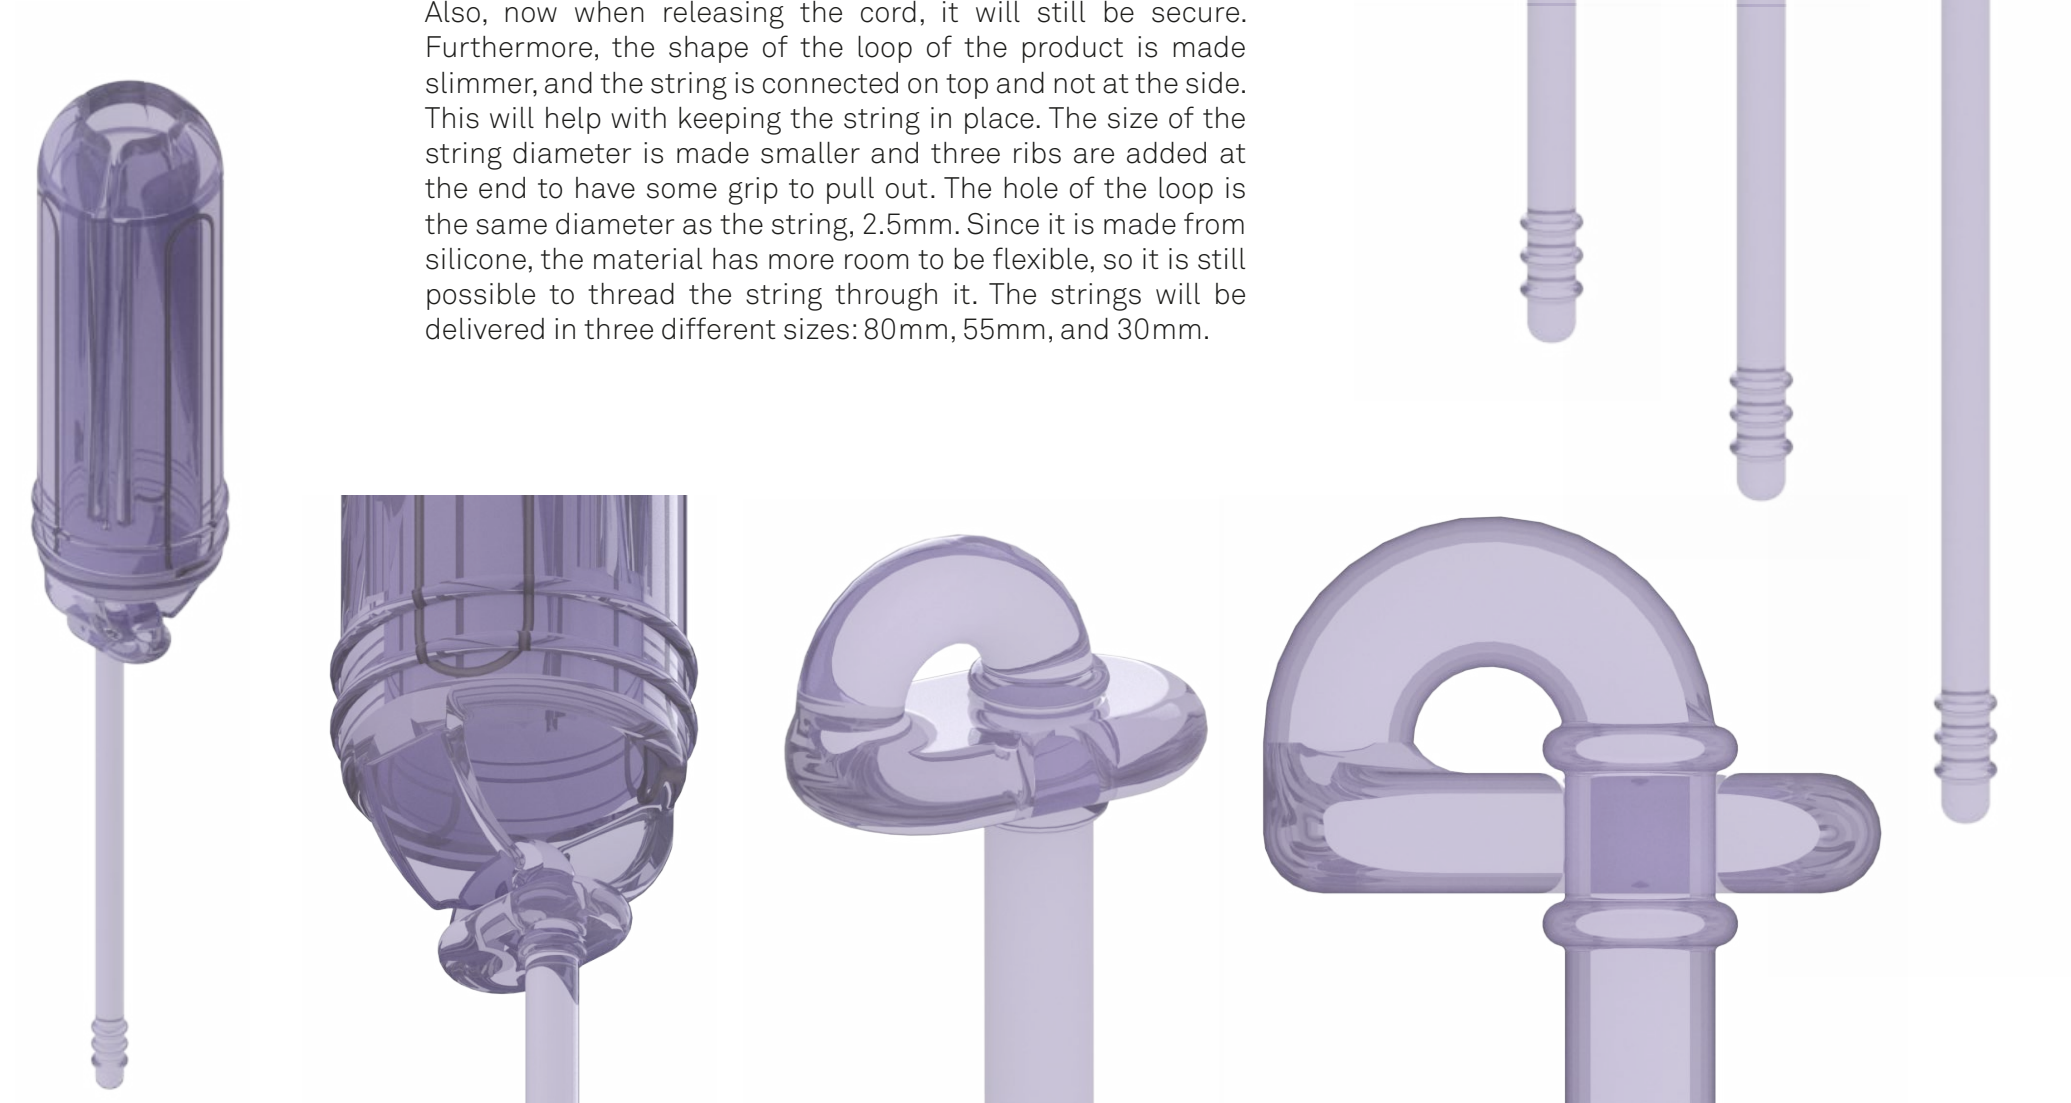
Removable string method 2 - instructions on how to thread the string through its loop
